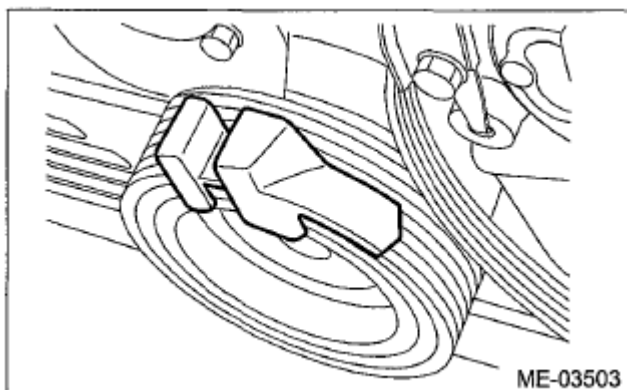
Aligning Belt Guide With Belt Line Of Crank Pulley
